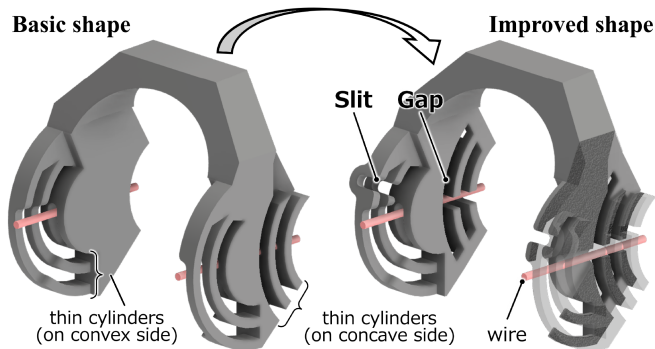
Example of the basic shape (left) and improved unit (right) for the third unit from the tip of Fig. 11. The improved unit has slit and gap elements. Wires run on both sides of the inside of the parts, and through the pulling of the wires, a thin layer deforms and makes contact with the layer of the other unit.
